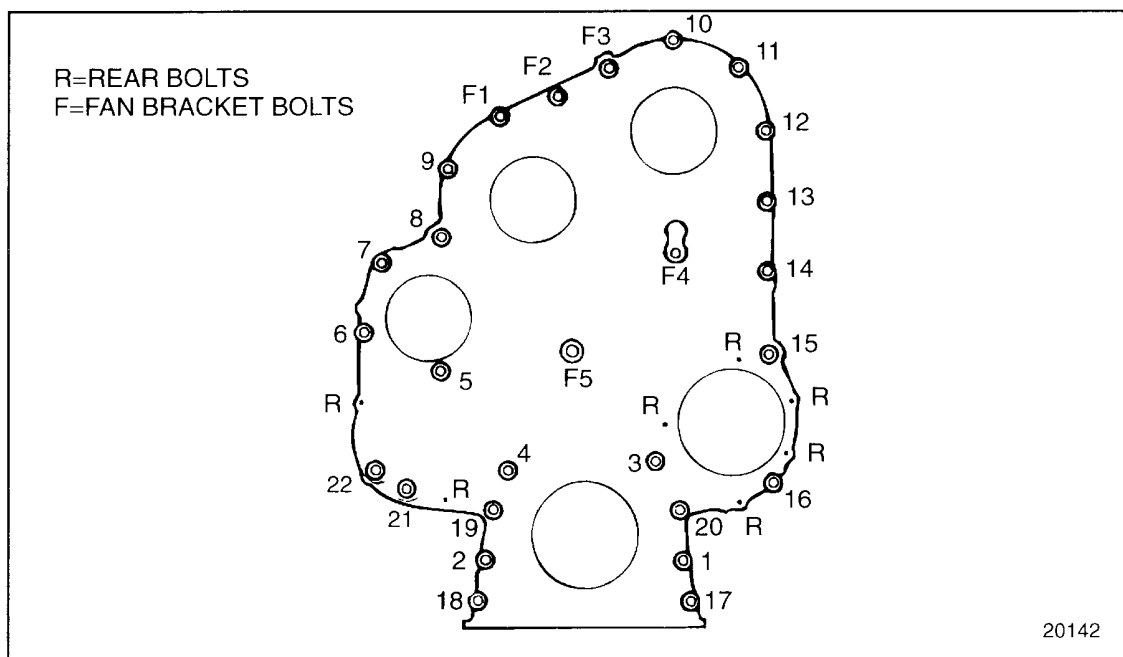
Gear Case Cover Bolt Torque Sequence (Front)
